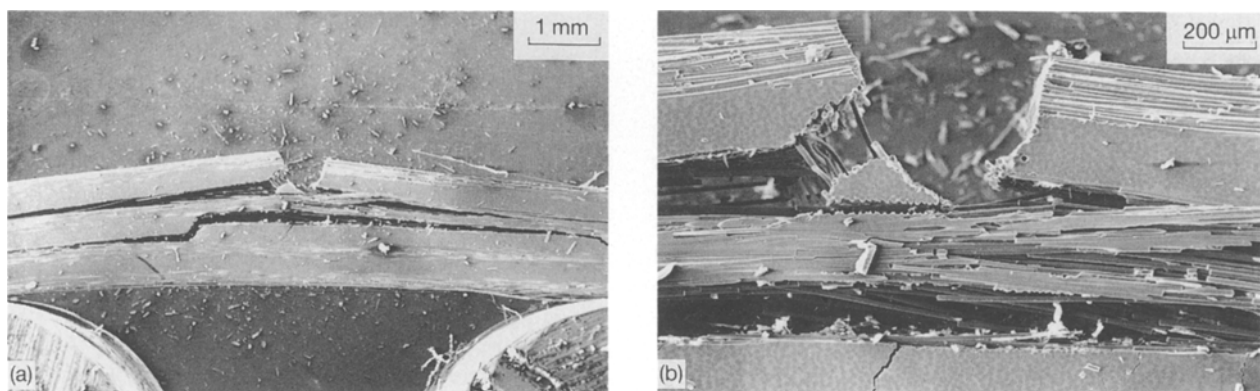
Tensile fracture in a four-point-bend specimen of 0° ply below the notch: (a) overall view, and (b) detail of the principal load-bearing 0° ply after failure.
